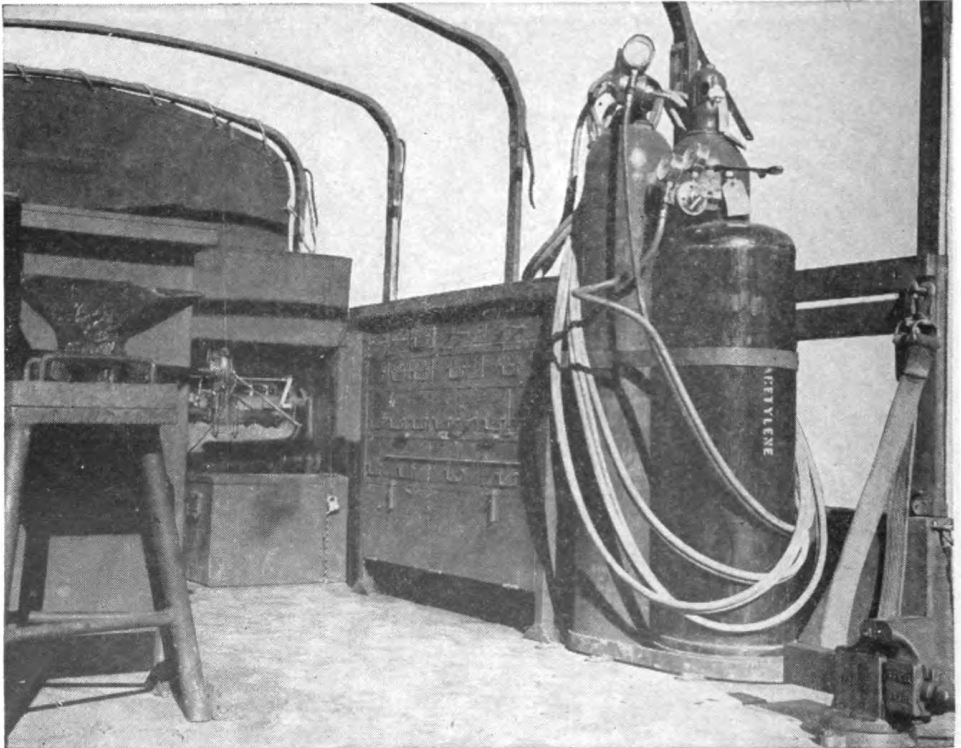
Shop equipment, third-echelon, motorized: set No. 9, welding.
